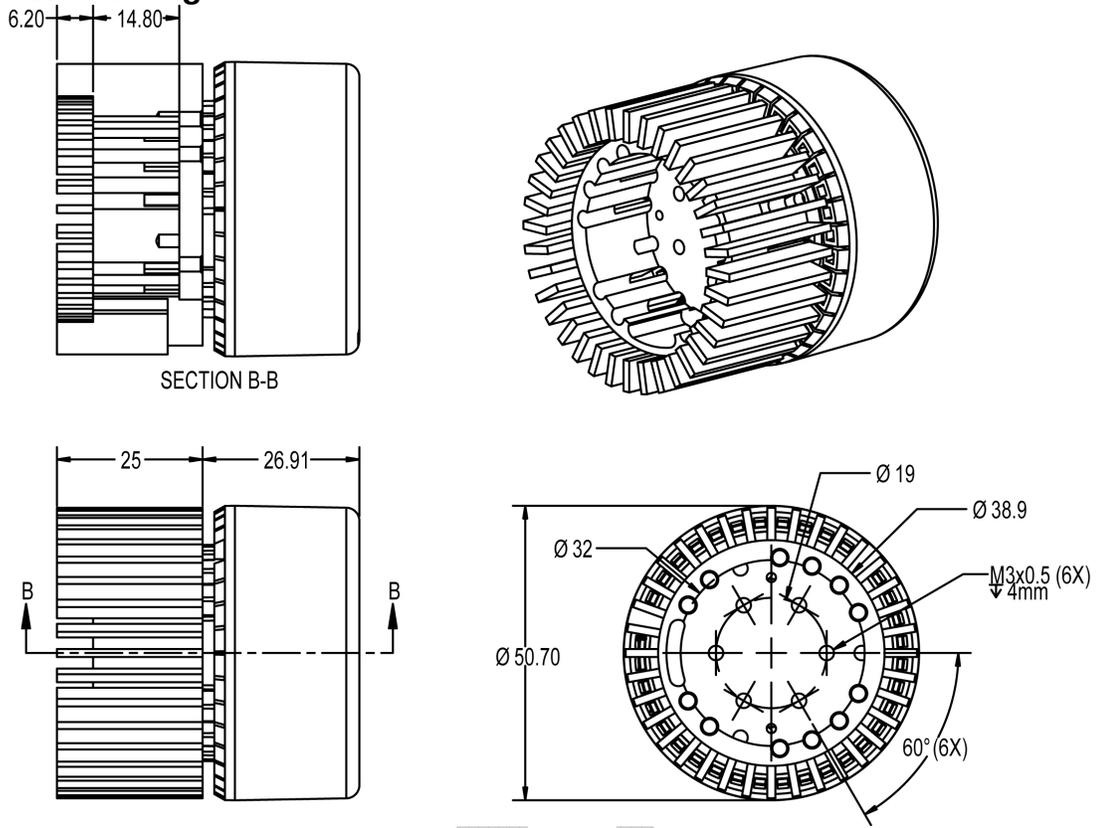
Mechanical Dimension Drawing. All dimensions in mm.
